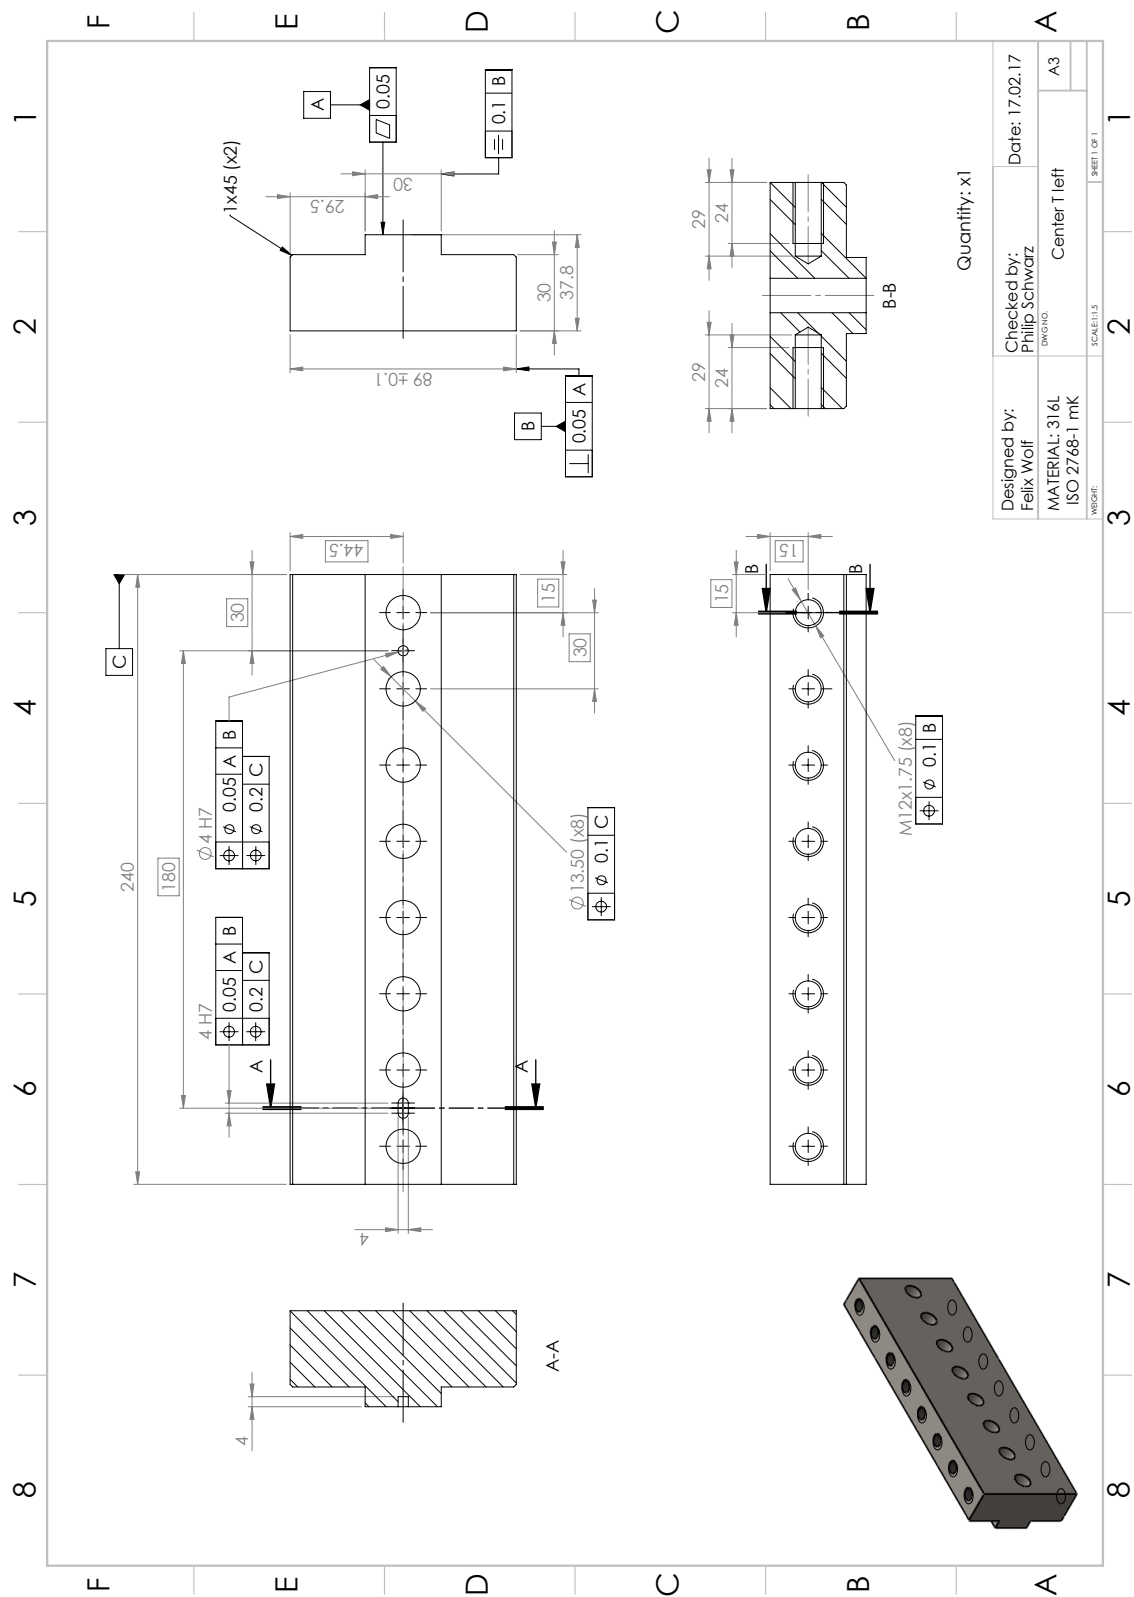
Manufacturing drawing of the heat-treatment mould left centre part.
